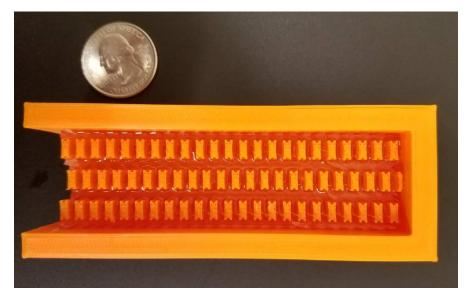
3-D printed top view model 2 Top view of a 3D printed mold of the Re-entrant Masters-Evans model 2
